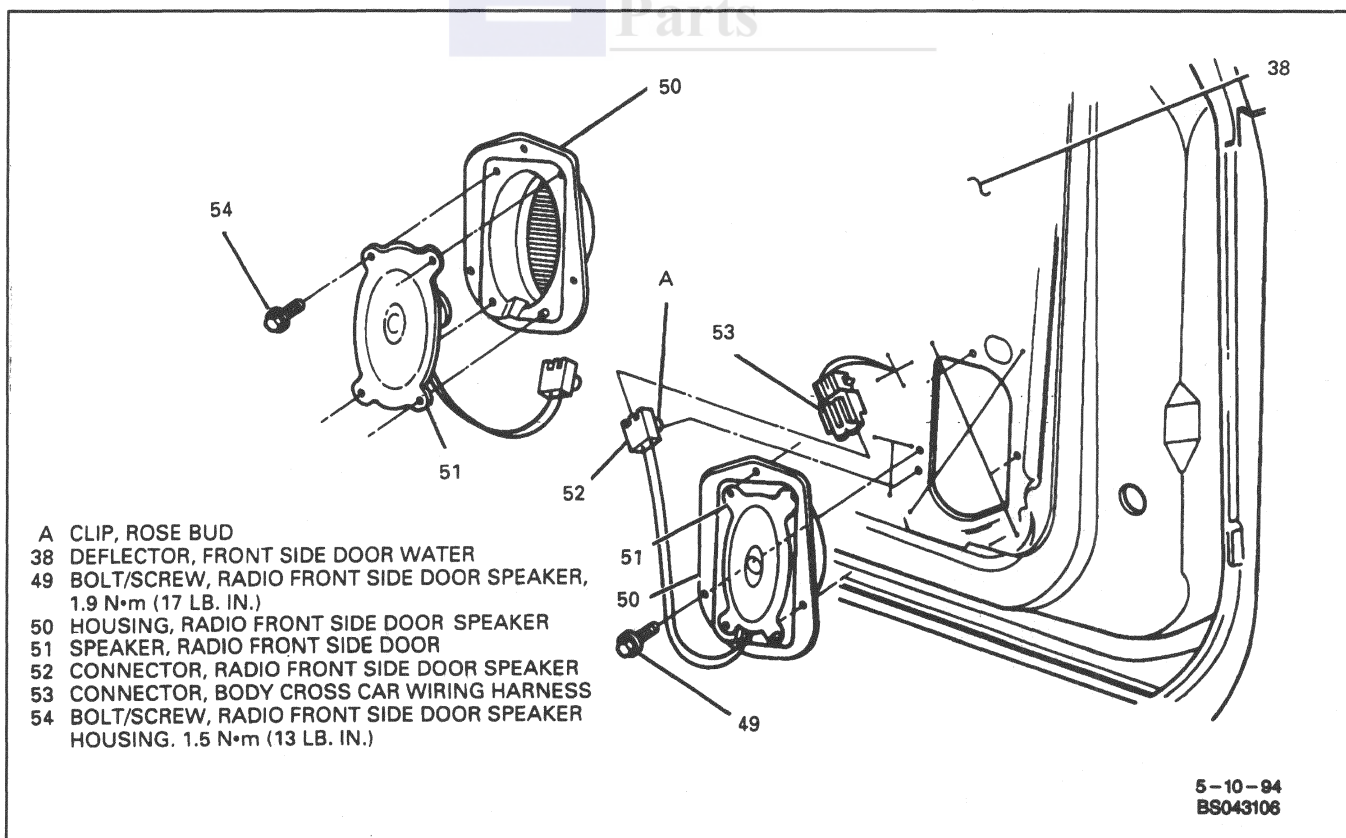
Removing Radio Front Side Door Speaker-(Chevrolet)
